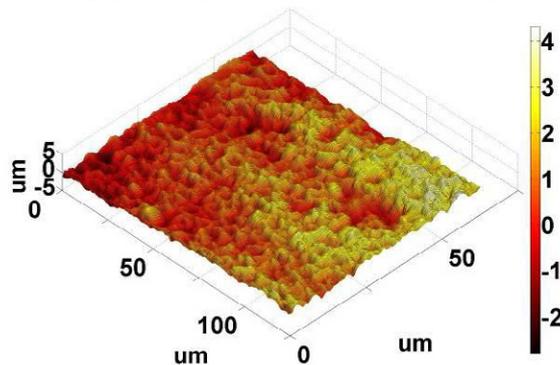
Micro EDM Milling machining with Cu tube 0.2 mm Micro Hole 2.2nF -200V 10000 rpm
